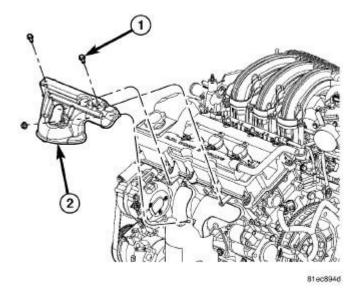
Upper Maniverter Heat Shield Courtesy of CHRYSLER LLC
